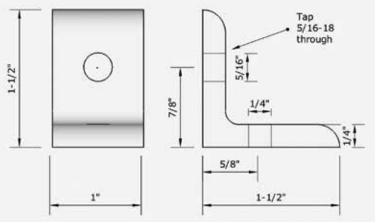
Dimensions for the aluminum angle brackets that clamp the shield to the lathe bed
